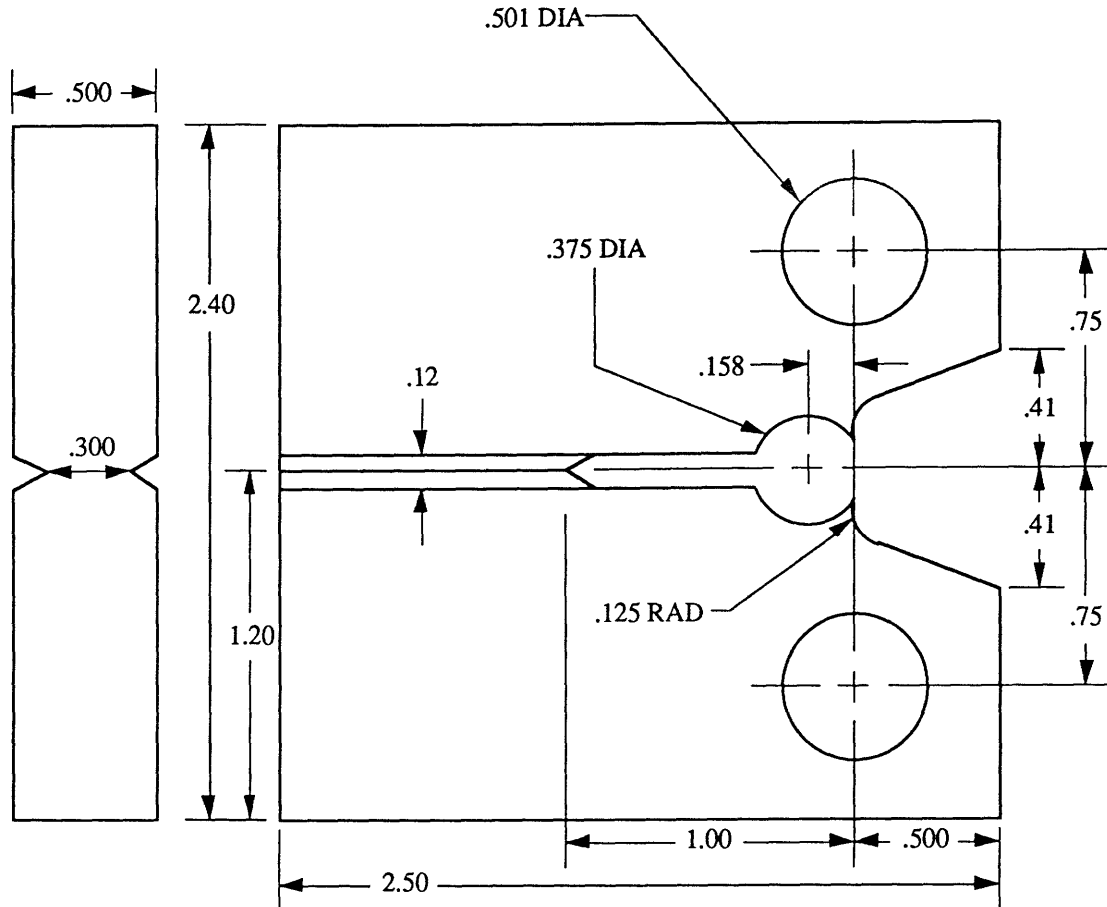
The compact tension specimen used for fatigue crack growth rate testing. All dimensions are in inches. The machined starter notch has an included angle of 60° and radius of curvature of 0.015" and the mouth opening for the COD gage is angled at 20°.
